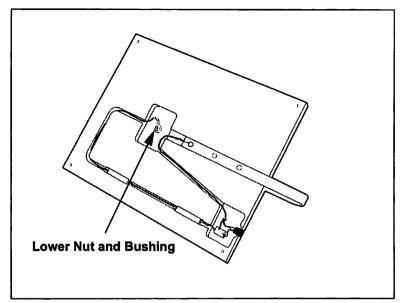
Loosen the bottom nut to unwrap the wire from the bottom bushing.
